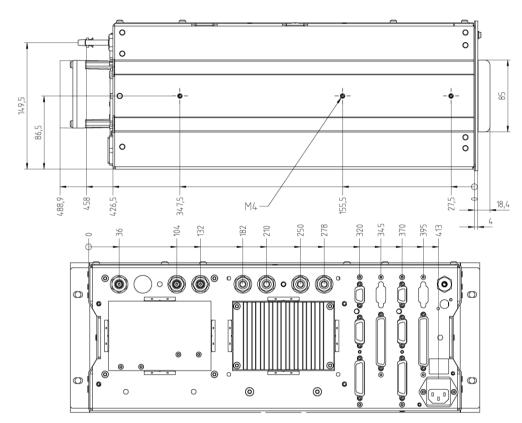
ULTRAMAT 6E and ULTRAMAT/OXYMAT 6E, dimension drawing: Side view and rear of the device
